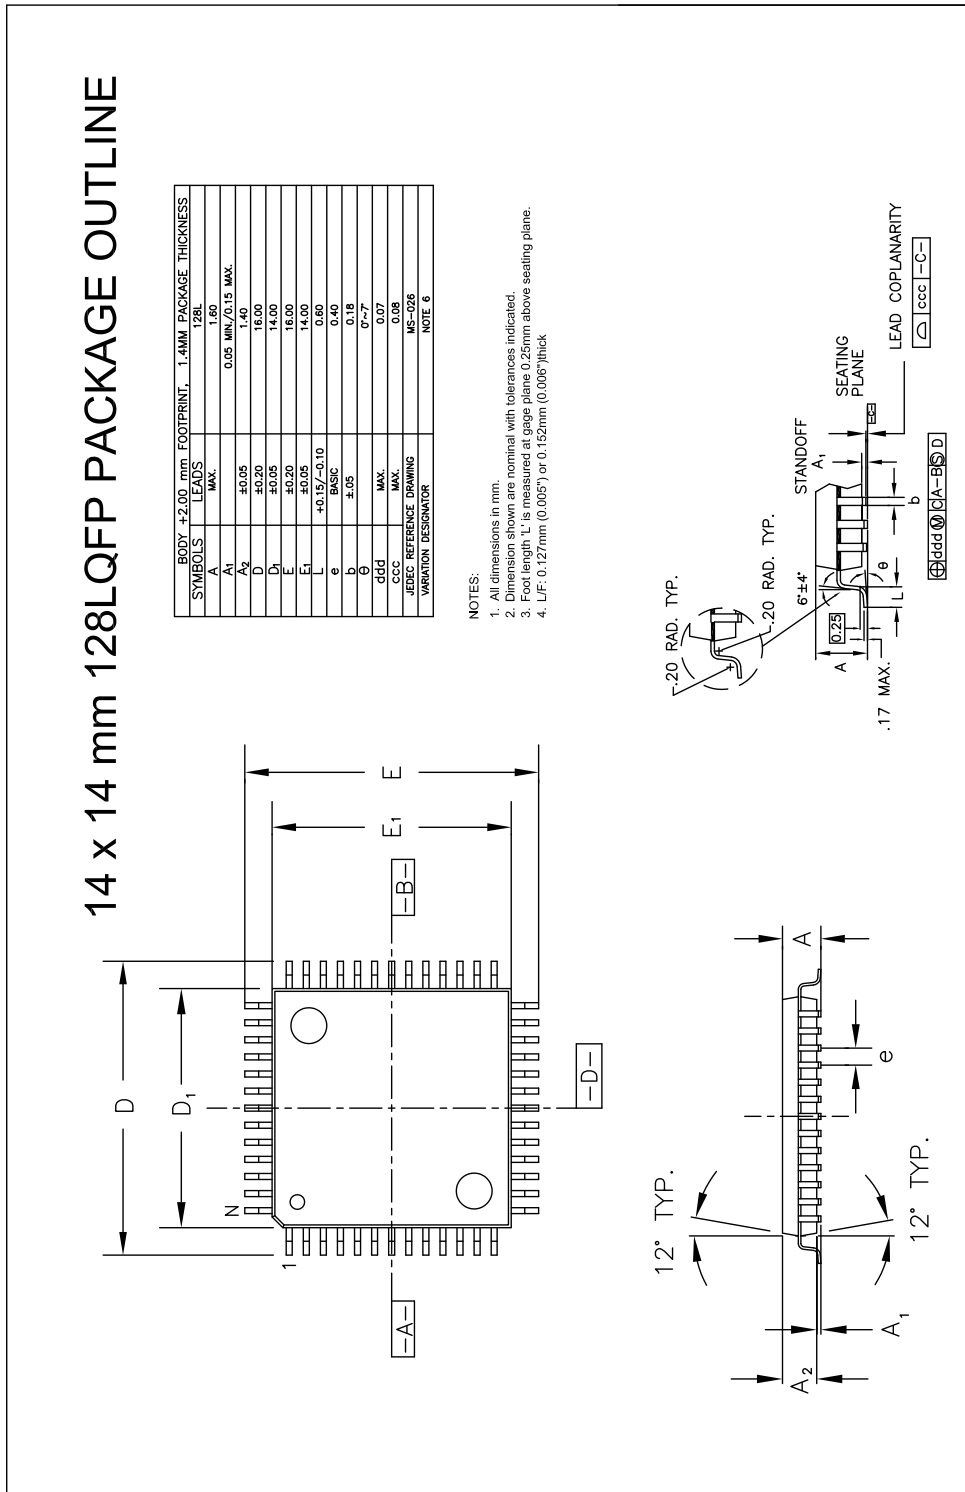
128-Pin Low-Profile Quad Flat Pack (LQFP) Package Drawing
